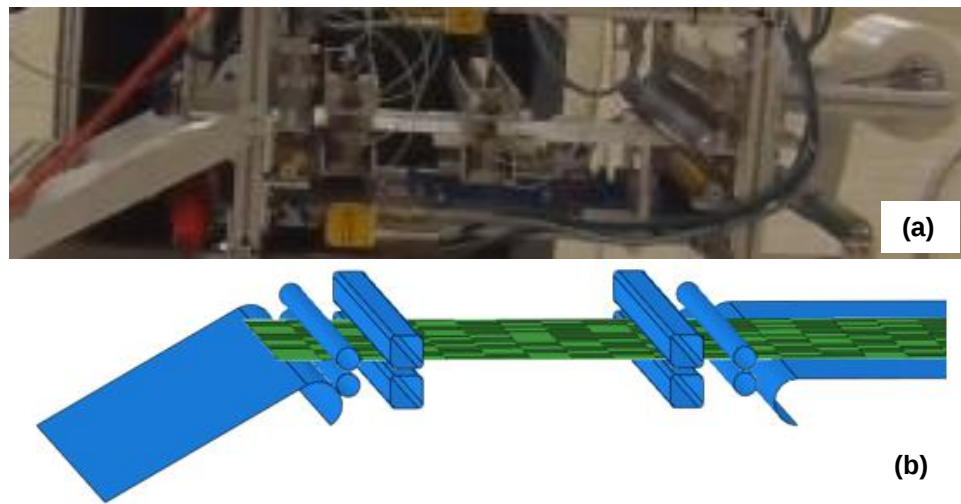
Close-up view of the shifting mechanism (a) physical prototype and (b) finite element model.
